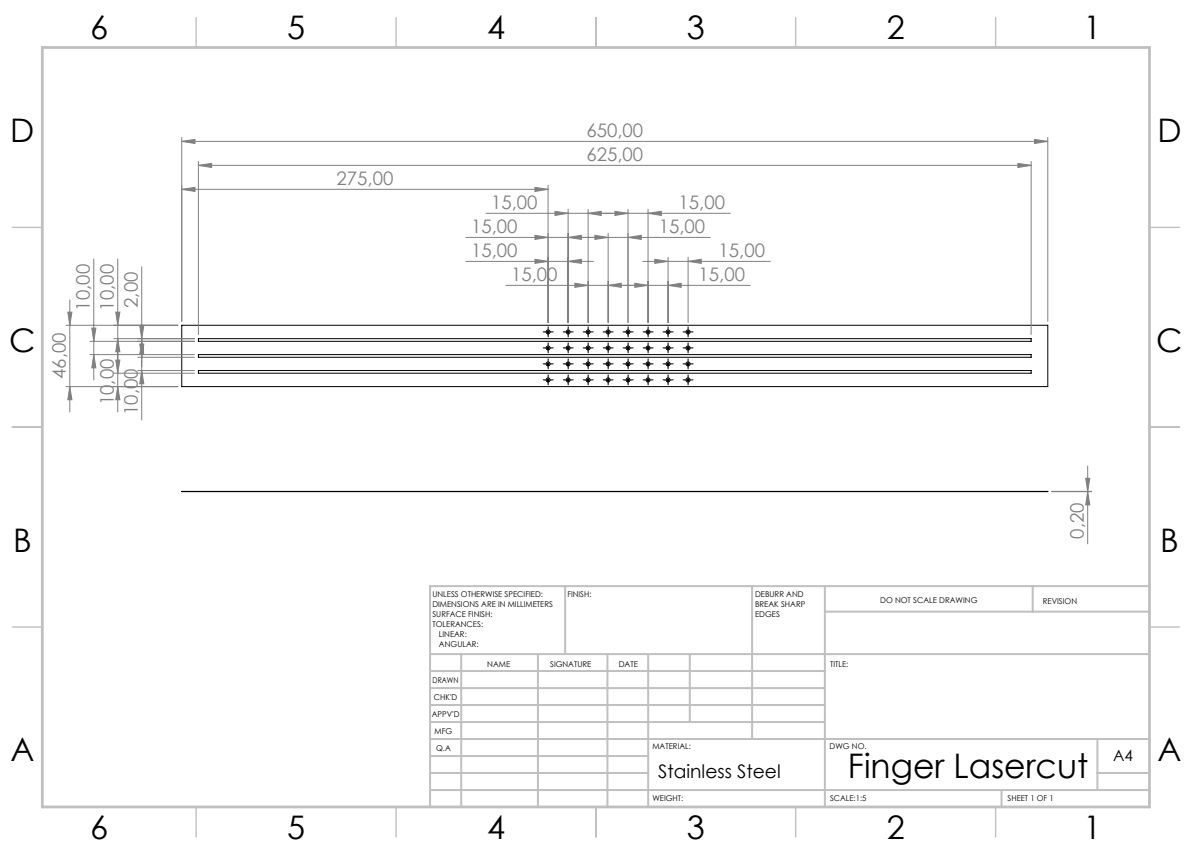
Dimensions of the laser cutter file for the stainless steel fingers.
